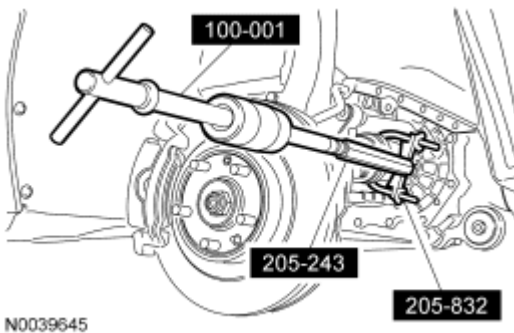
Identifying Special Tools (100-001, 205-243 And 205-832)
